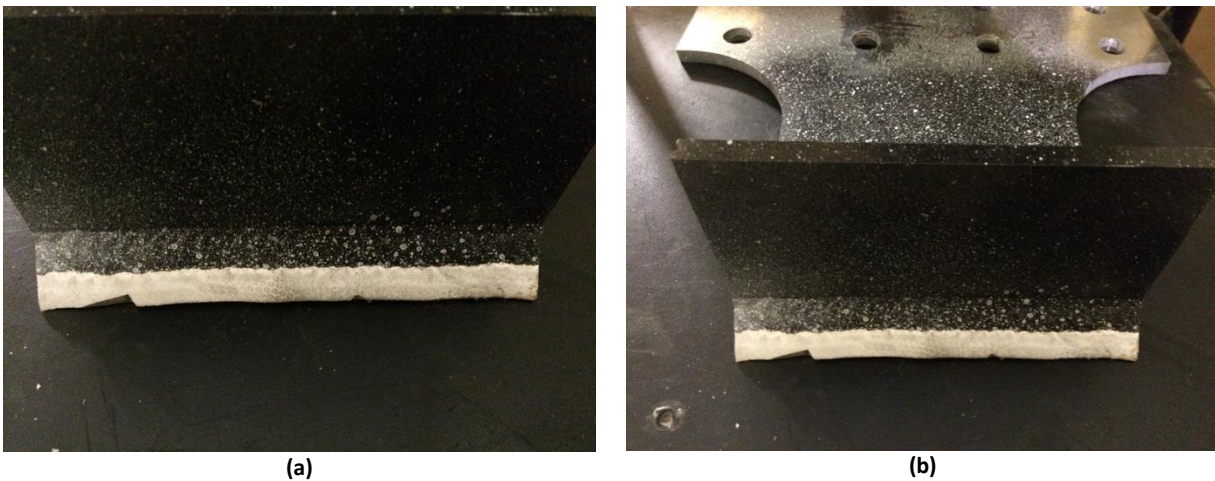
Specimen C2 Showing Failure at the Weld Toe
